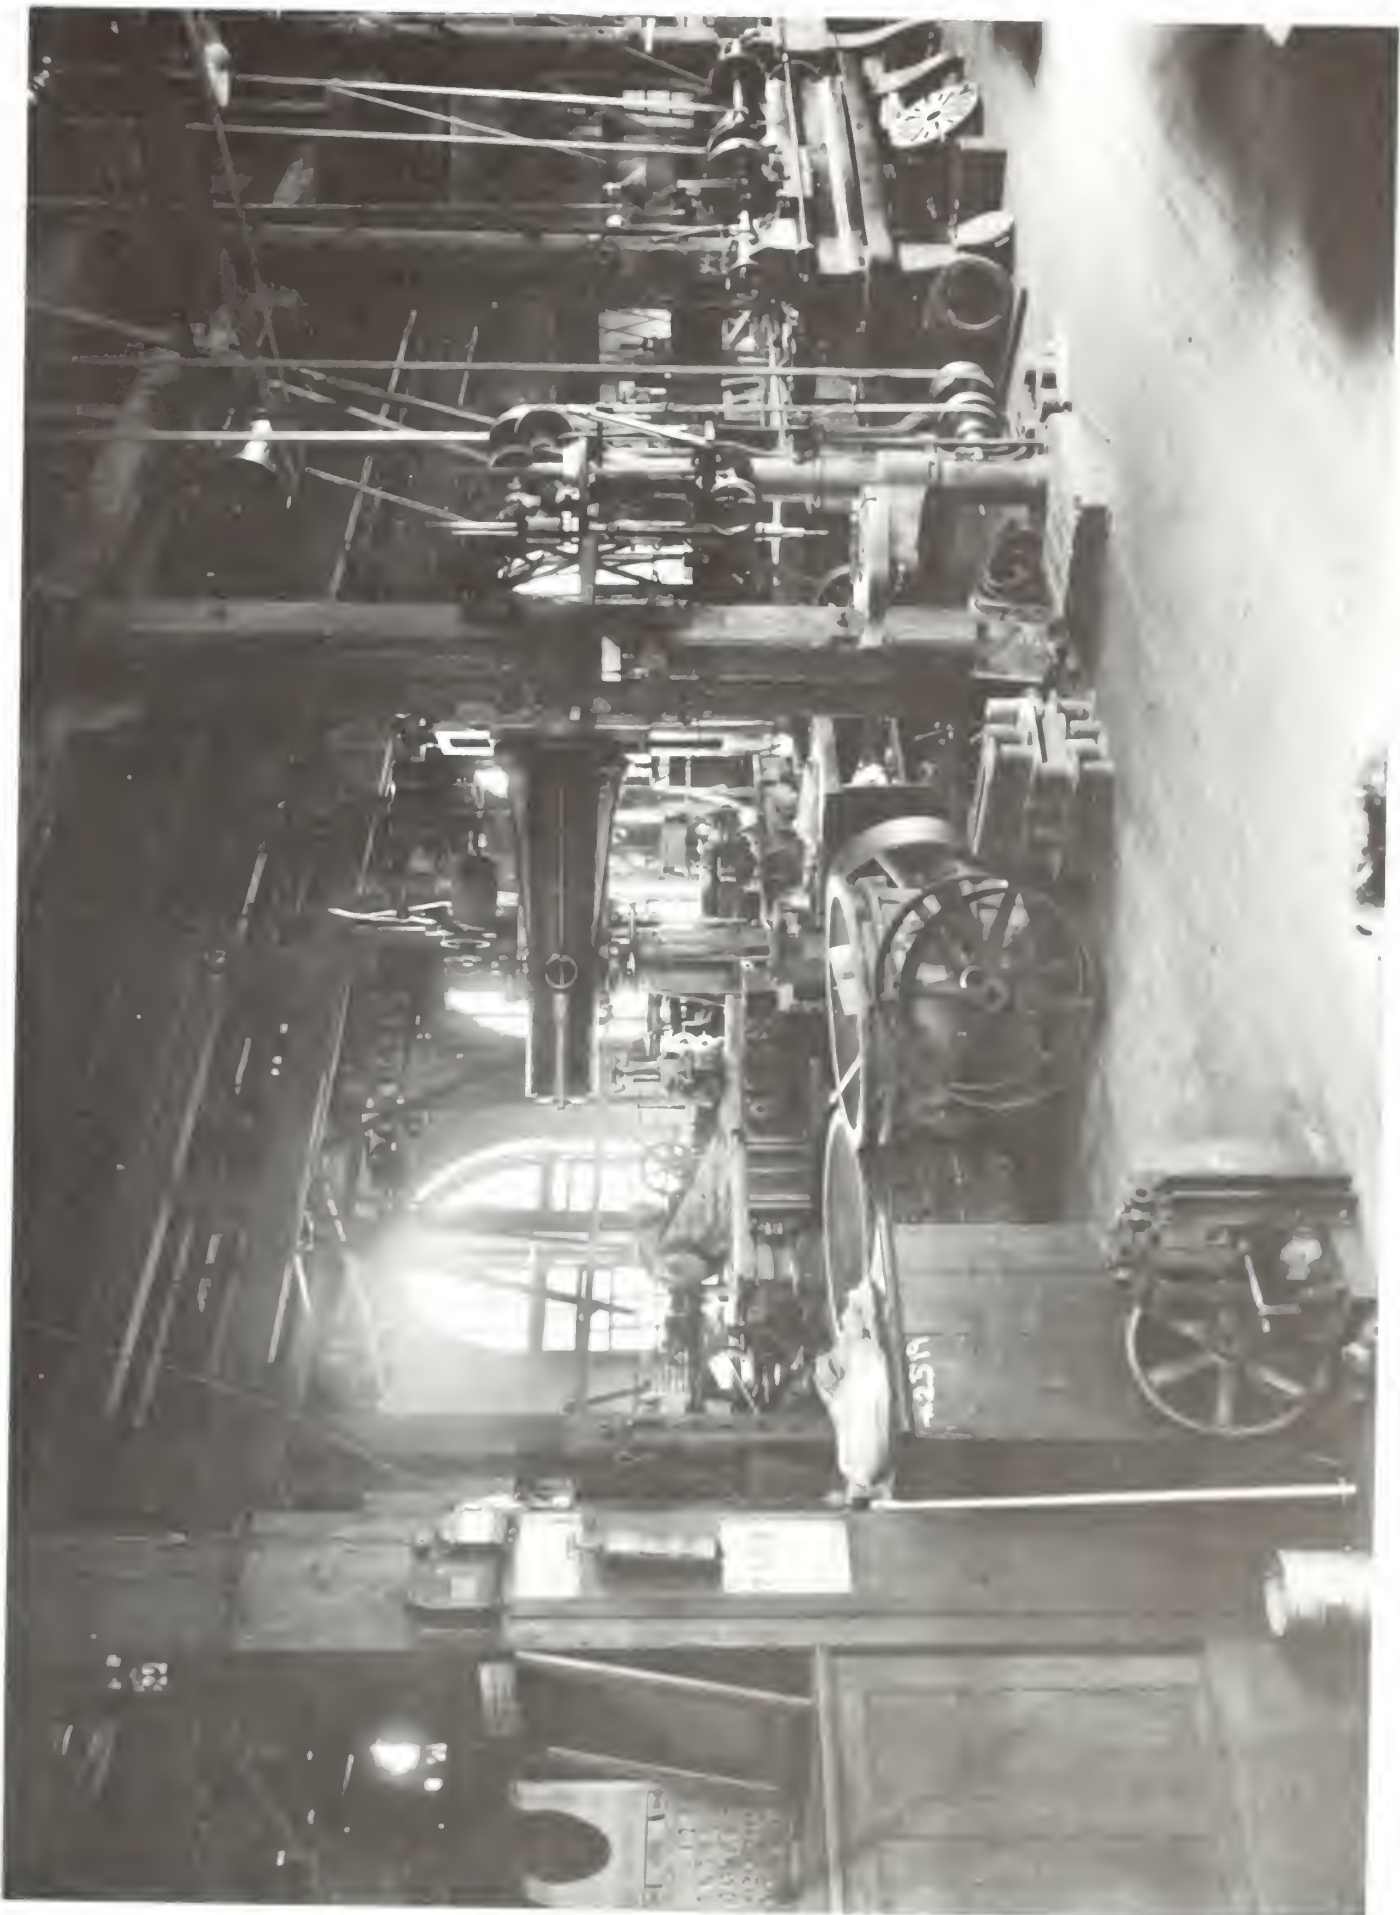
Heavy machine shop, Building 5, south aisle, looking west,
